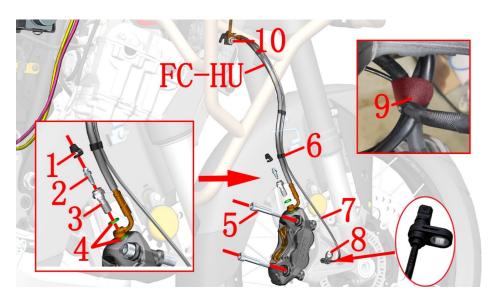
FRONT FORK COMPONENT		ABS brake system-A 3	CHK	(0)
